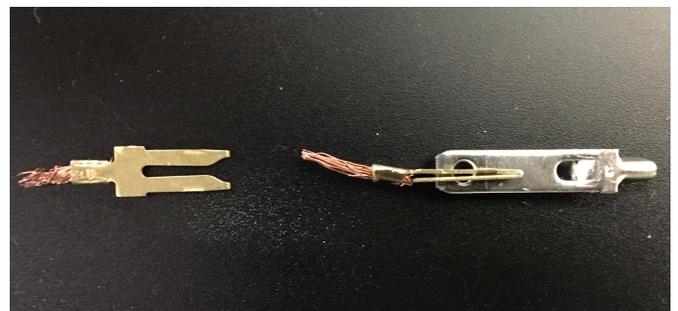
Female end of the Solid Ground extension cord showing plenty of metal blade receptacle for incoming power tool blades.
